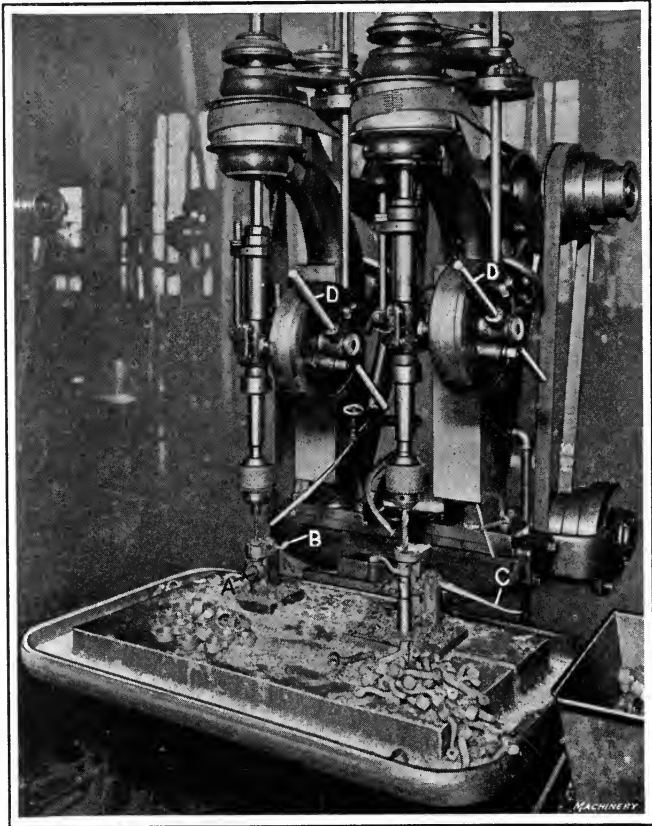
Sensitive Drilling Machine equipped with Power Feed which enables One Operator to keep Two Spindles Constantly in Operation
